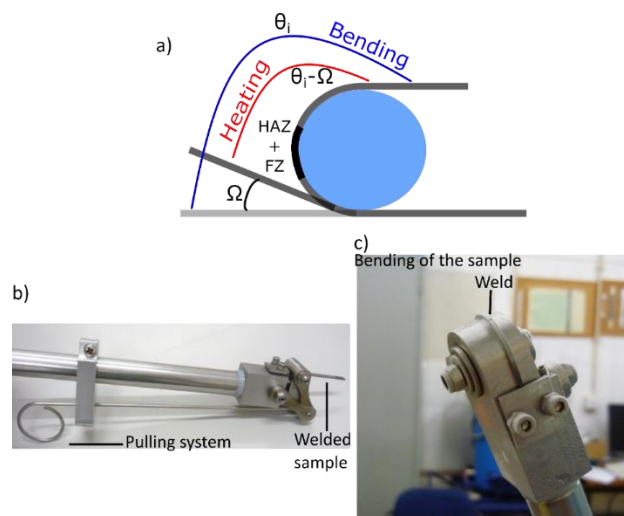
a) Schematic illustration of the shape memory effect tests performed on laser welded NiTi plates; b) device for bending the samples; c) sample being bent.
